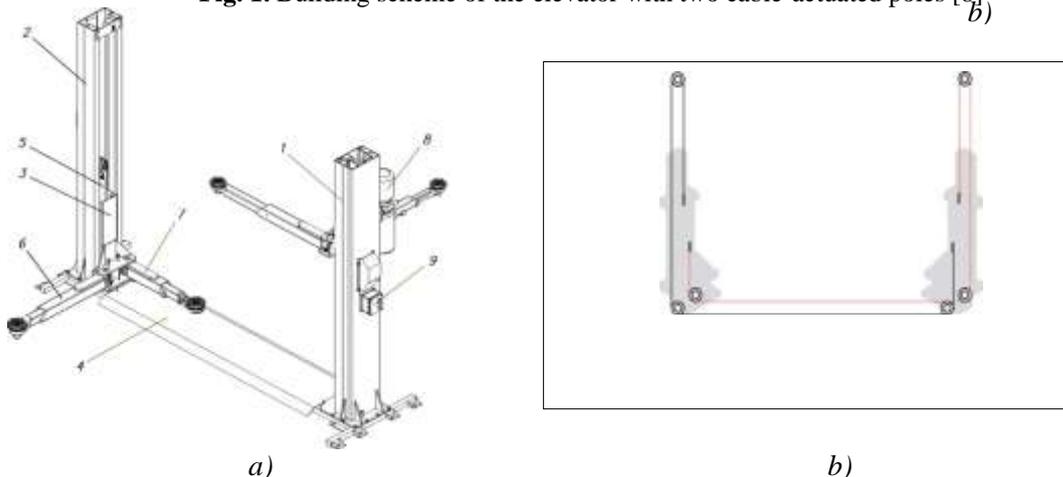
Building scheme of the elevator (a) and kinematic scheme (b) of the cable mechanism
